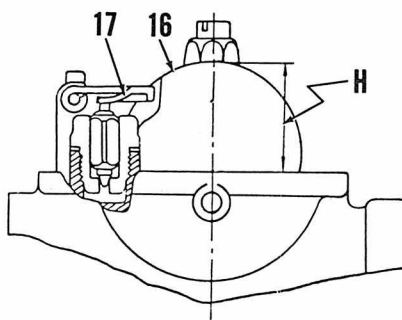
Float level (H) is adjusted by bending tang (17). Float bowl gasket should be removed when measuring.
